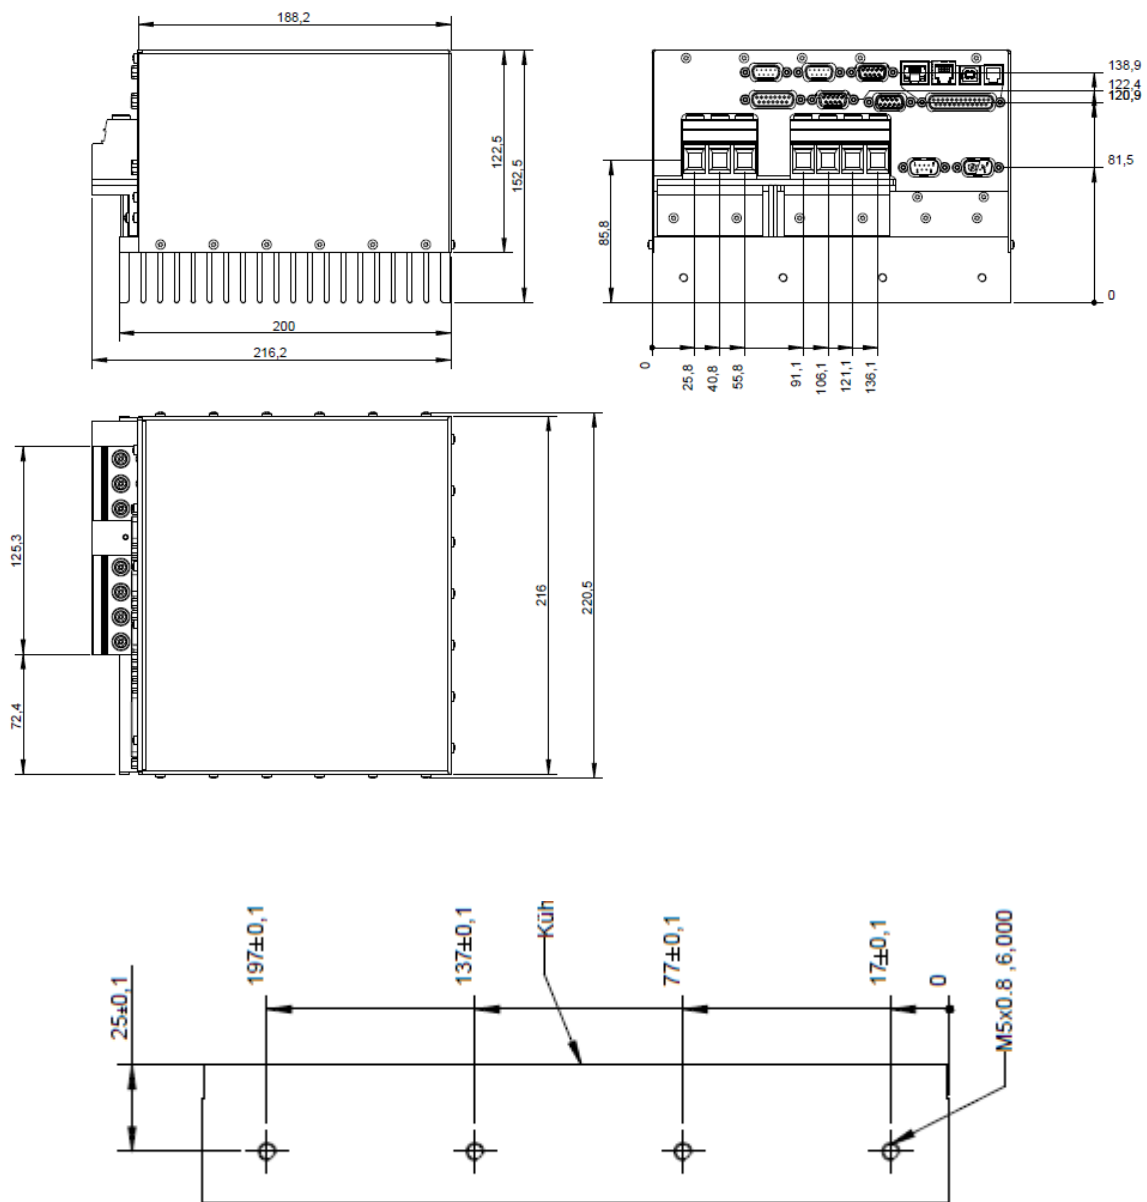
Mounting Drawing for Base Plate SWM7-48/100
